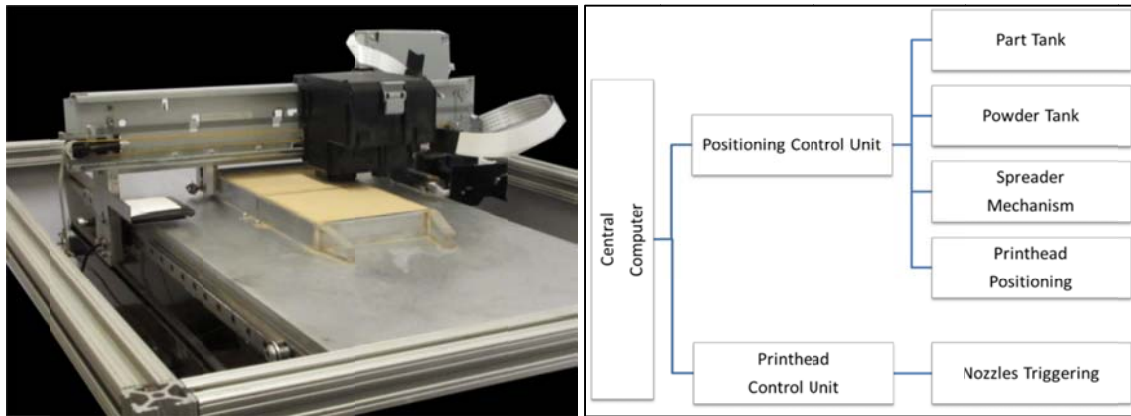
(a) SIS-Metal beta machine (b) Block diagram of the machine
